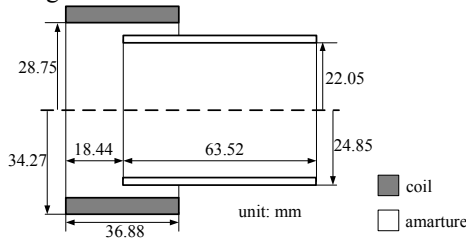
The schematic drawing of coil gun model and its dimensions (mm)
